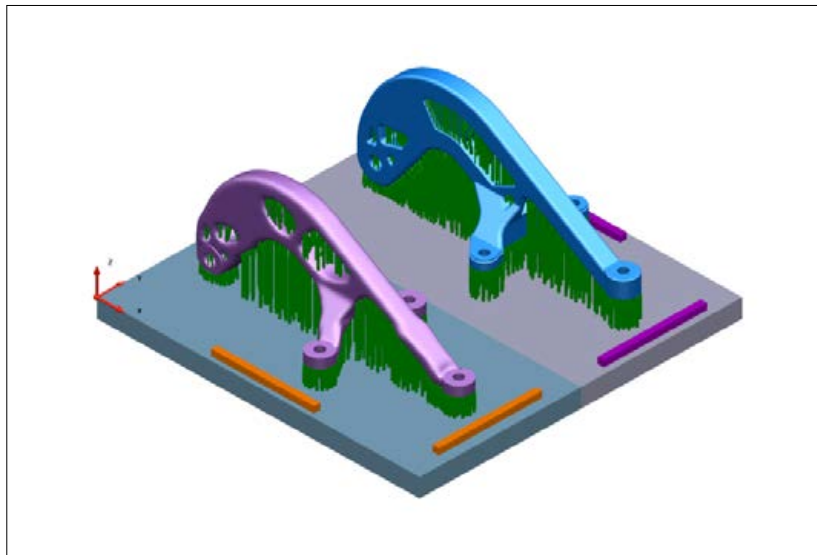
Final platform nesting with datum blocks for wire EDM and support fixtures for additive and subtractive
